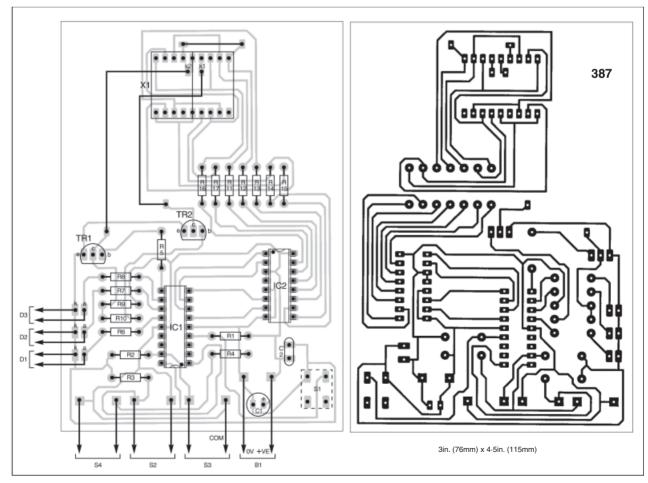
Driver Alert printed circuit board component layout and full-size underside copper foil master pattern. The Reset switch S1 is soldered on the track side and a small access hole drilled in the underside of the case.
